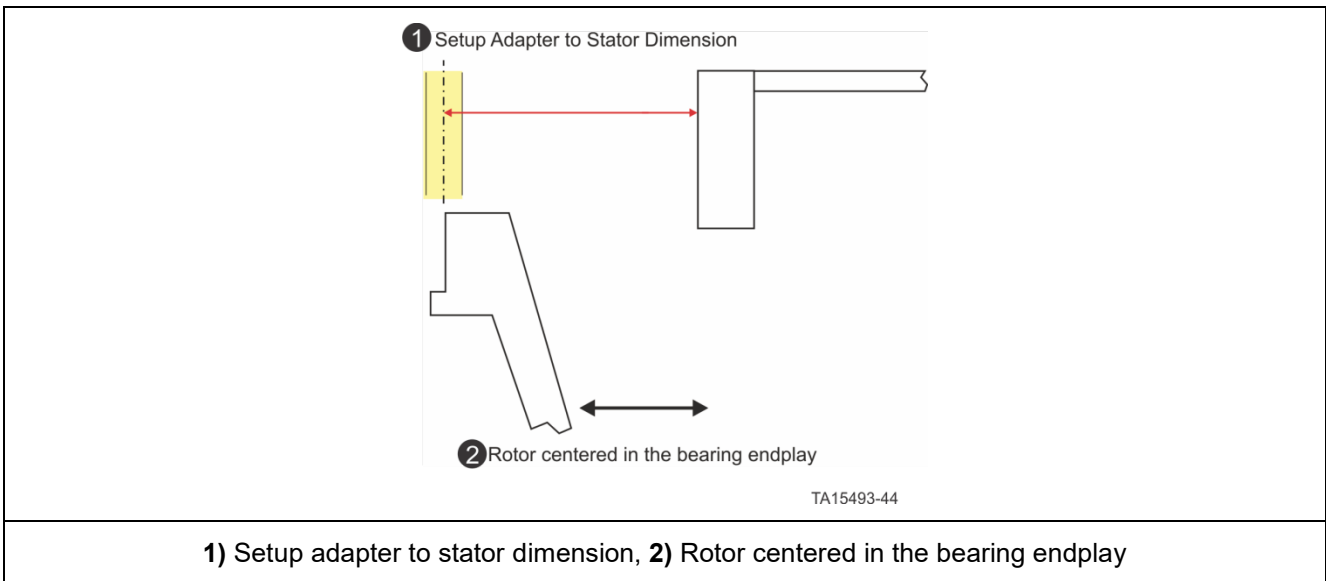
Measure "adaptor to stator dimension" between face of rotor adapter and face of generator pole ring - cone type rotor adapter with common straight edge. Three steps required.
